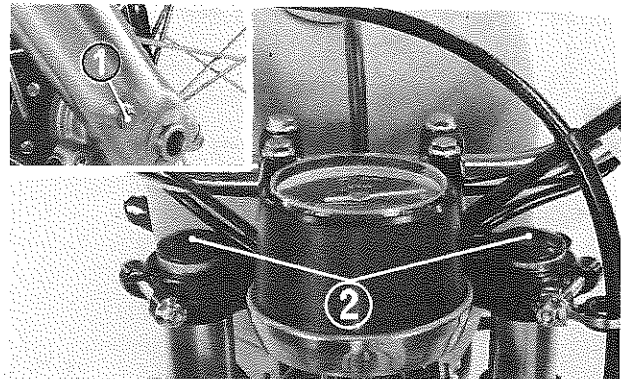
(1) Drain bolt (2) Rubber caps
